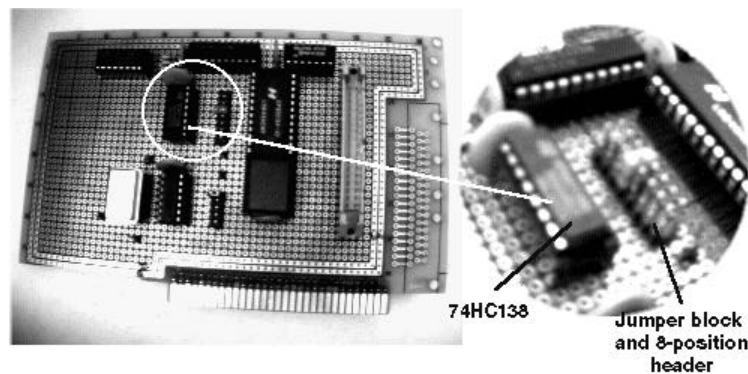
Unique card address assignment is achieved by moving a jumper block
